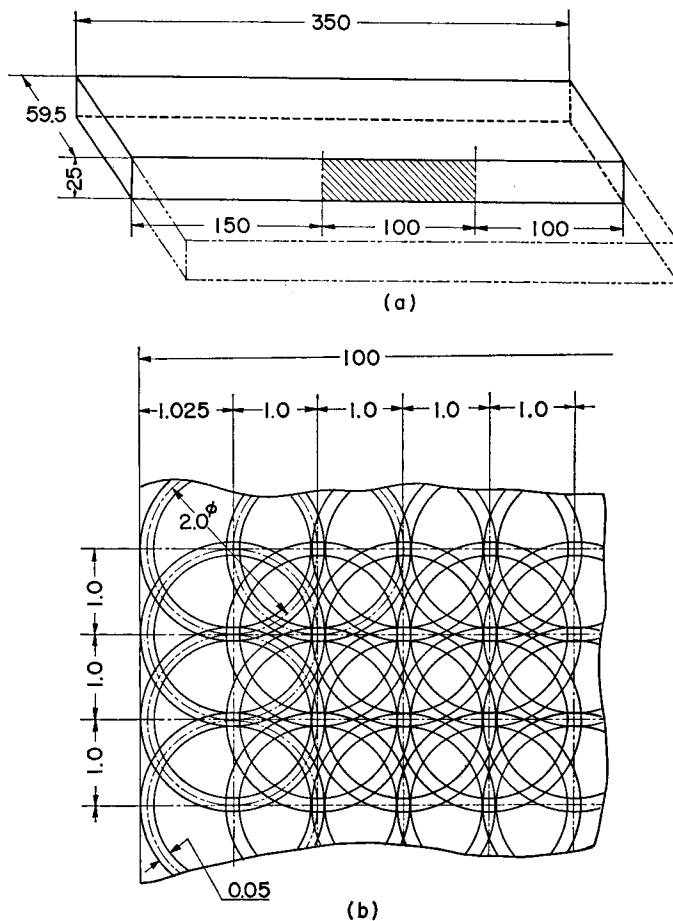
Dimension of the material used for the rolling tests (a) and the shape of pattern made by etching on the side (b).
